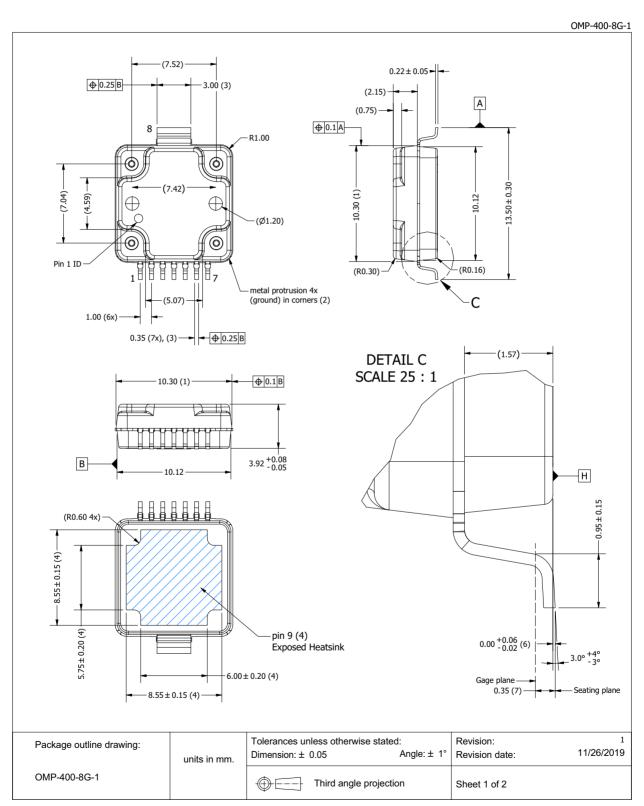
Package outline OMP-400-8G-1 (sheet 1 of 2)
